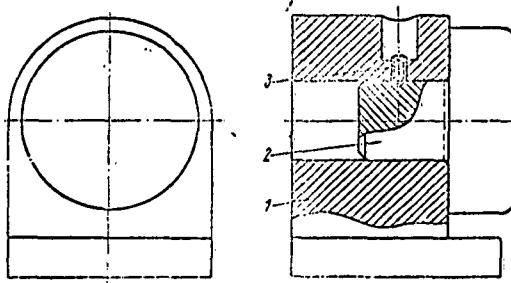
Device for fixing manufacturer's plate to frame. 1) Base; 2) mandrel; 3) screw.
